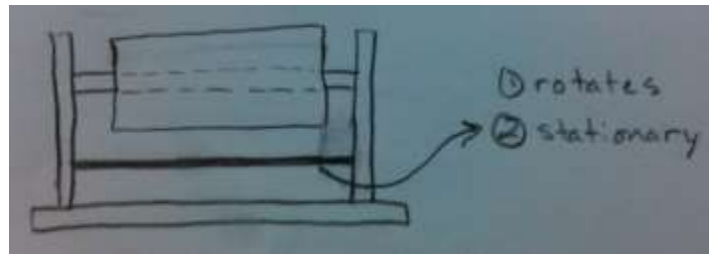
The foil would roll under a bar that could either be rotating with the foil or stationary and could possibly be magnetic to hold the foil.
